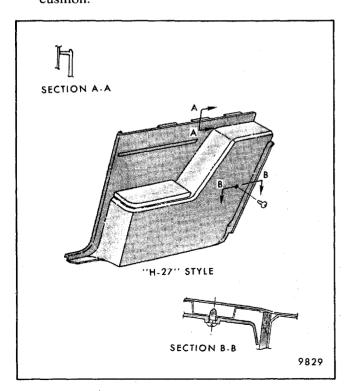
Quarter Trim Assembly Attachment - H-27 Style
